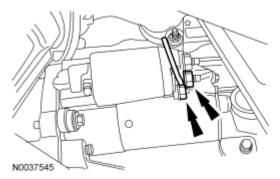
Starter Motor Bolt Courtesy of FORD MOTOR CO.
